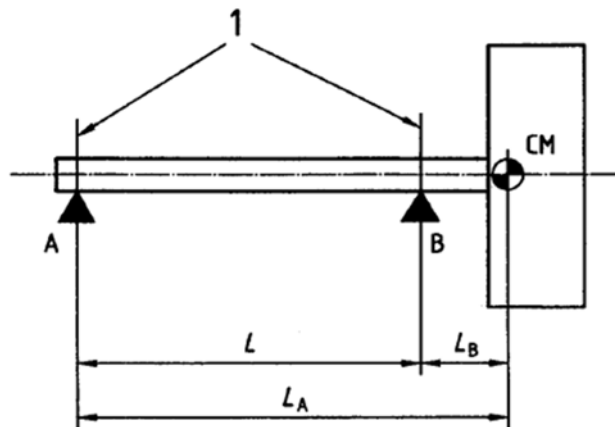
Tolerance planes 1 in bearing A, B and relative position with respect to center of mass (CM) for rotors with CM located outside of the bearings (*ISO 1940-1, 2003*).
